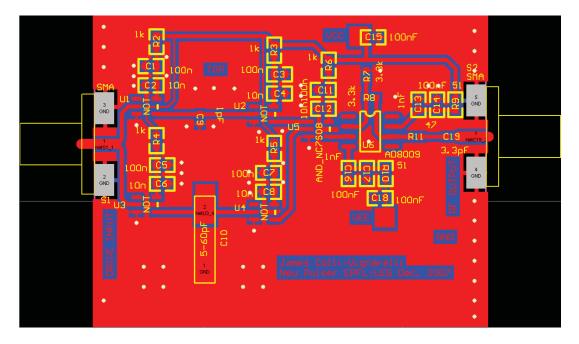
PCB of UWB Transmitter prototype nº 1, version 2
